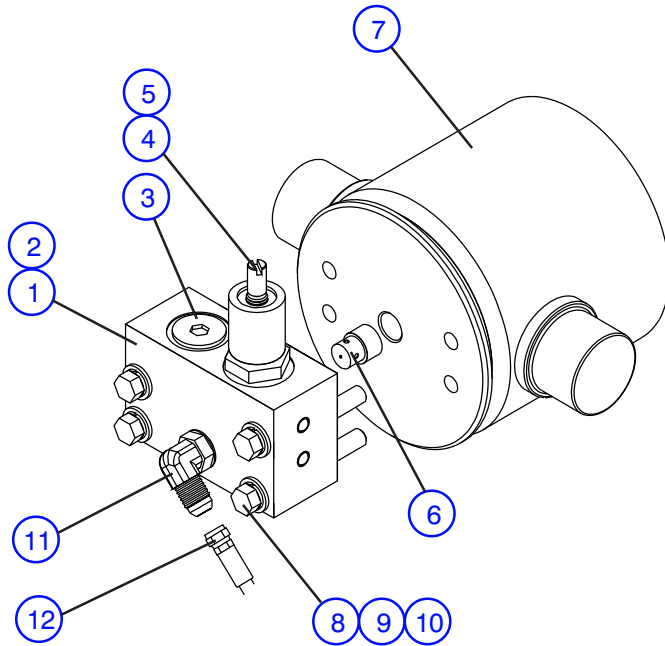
Lift Cylinder Assembly And Mounting Hardware
